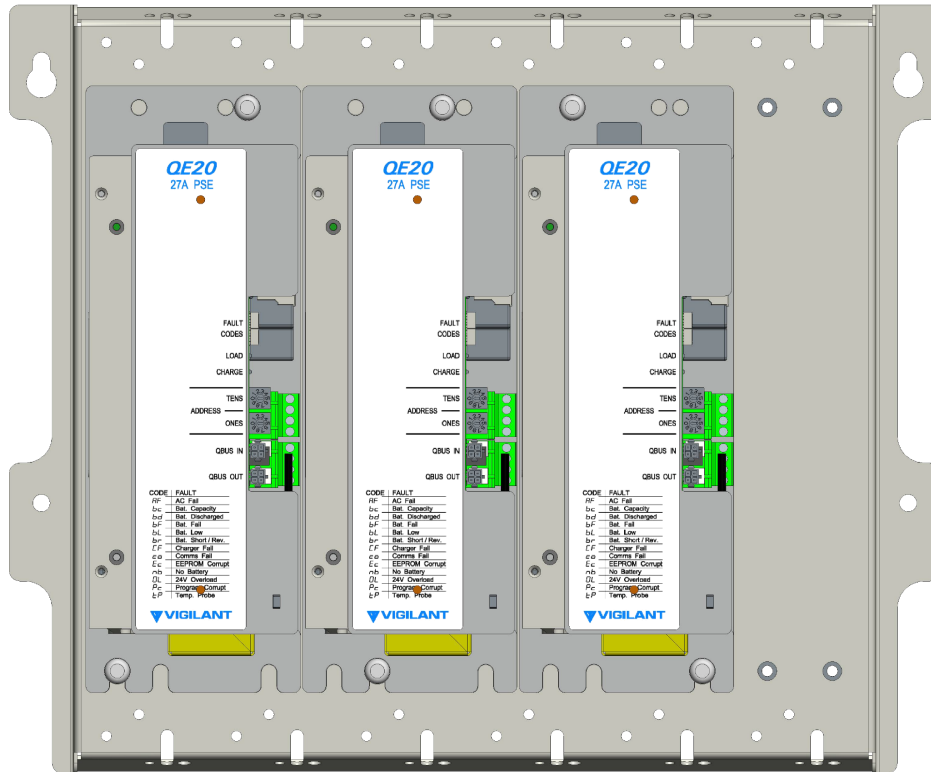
QE20 27A PSE Positioning – 3 per Frame
